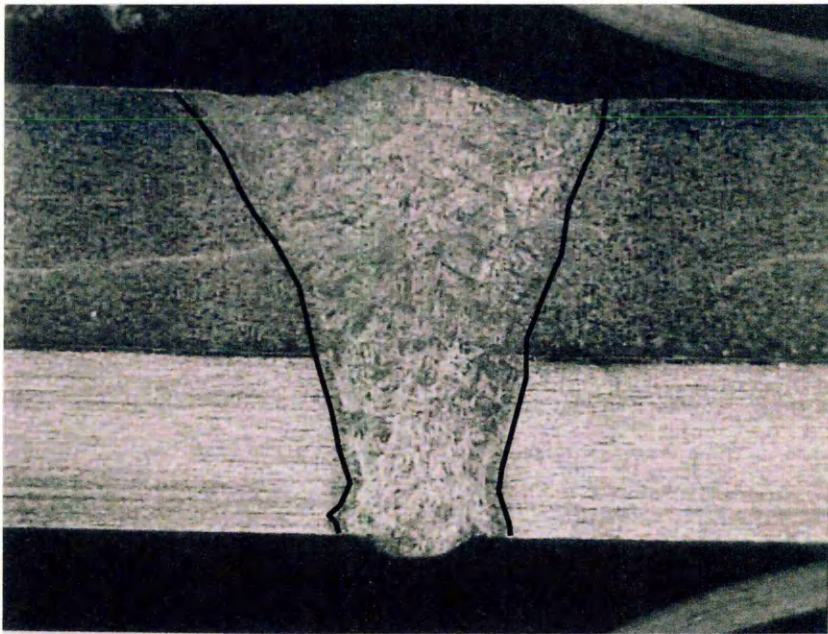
Weld bead shape obtained when the 1.2mm V1437 is at the top of the lap joint
